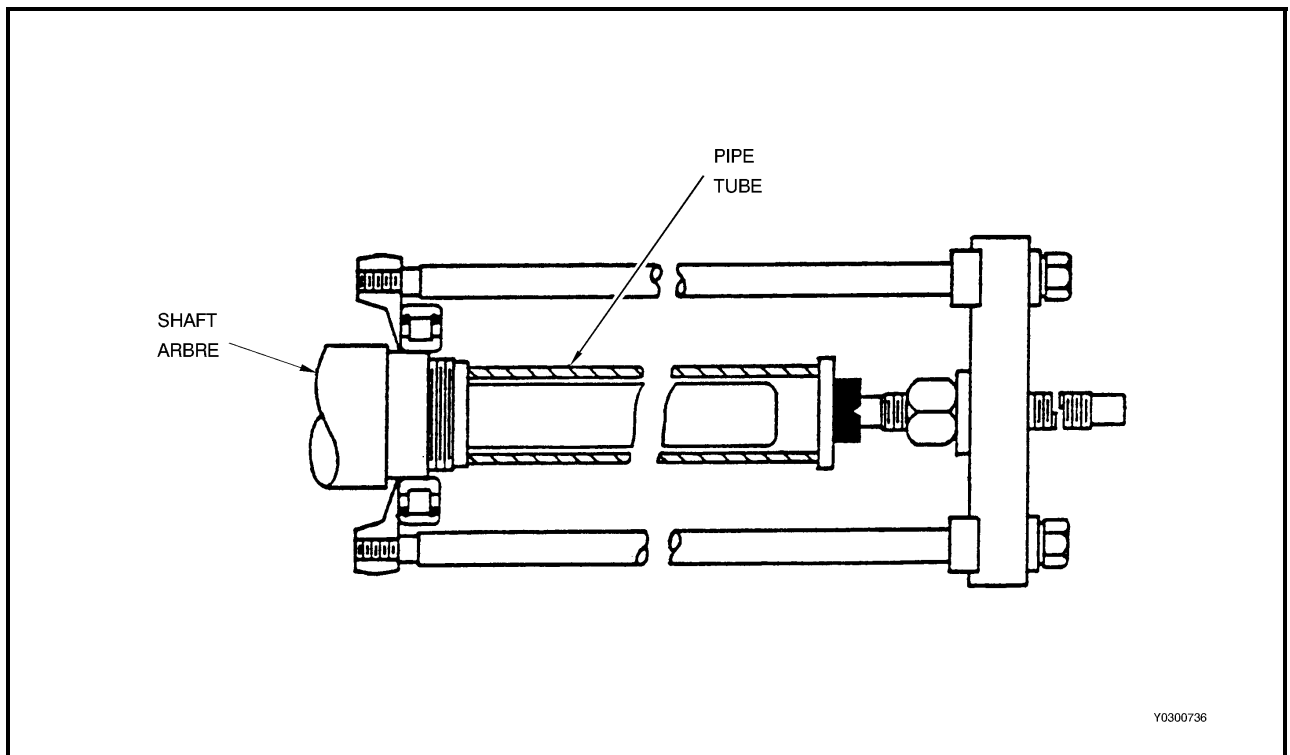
Bearing Removal from Motors with Long Extension Shafts Using a Tube
